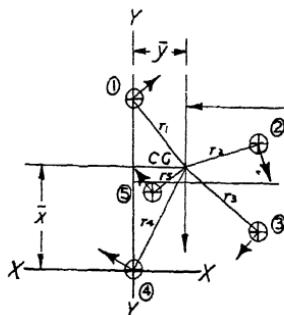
Eccentric load on bolted (or riveted) fitting.
